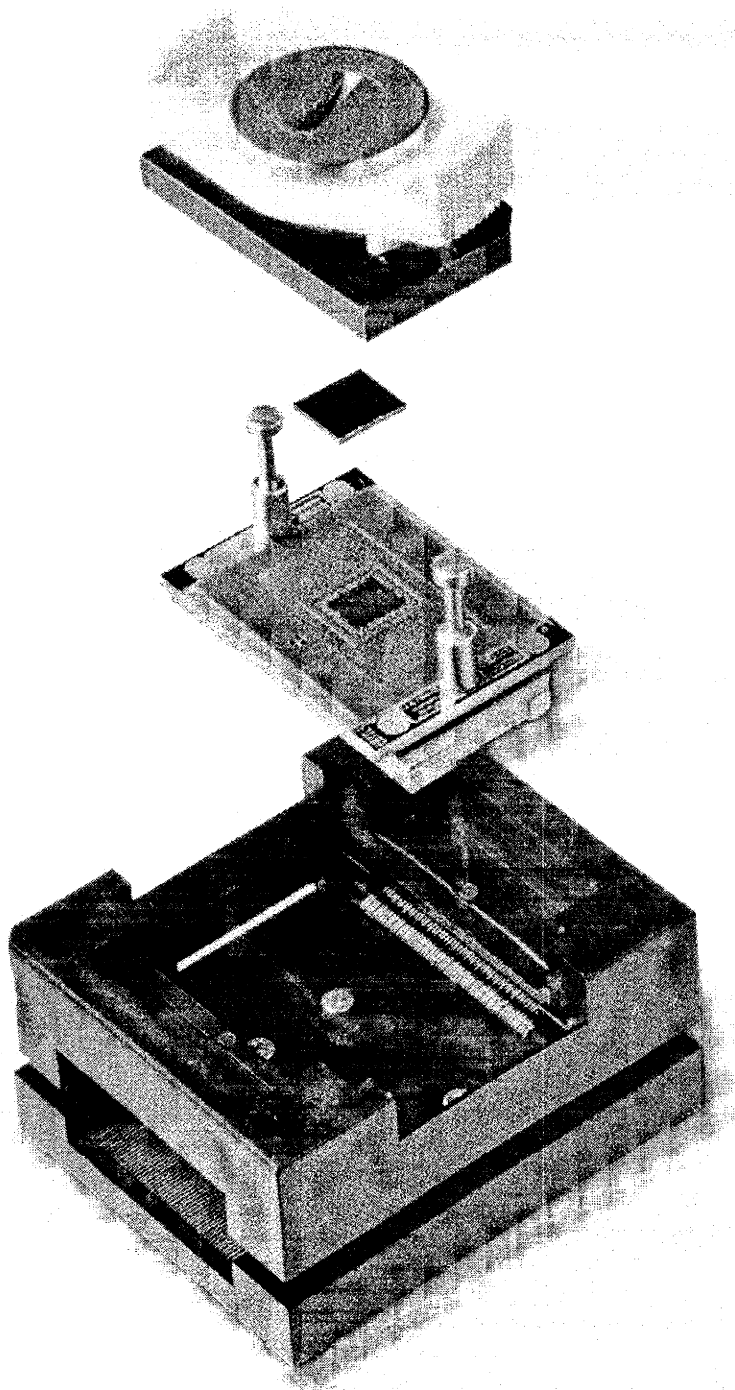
Exploded view of the DieMate™ KGD socket showing, from top to bottom, the lid, a die, the substrate, and the burn-in test socket[3]. The scale-up system uses only the burn-in test socket.
